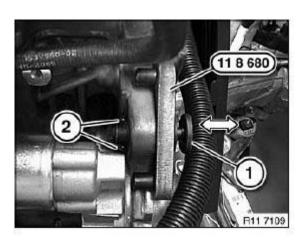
Identifying Locking Pin & Locking Balls Courtesy of BMW OF NORTH AMERICA, INC.
